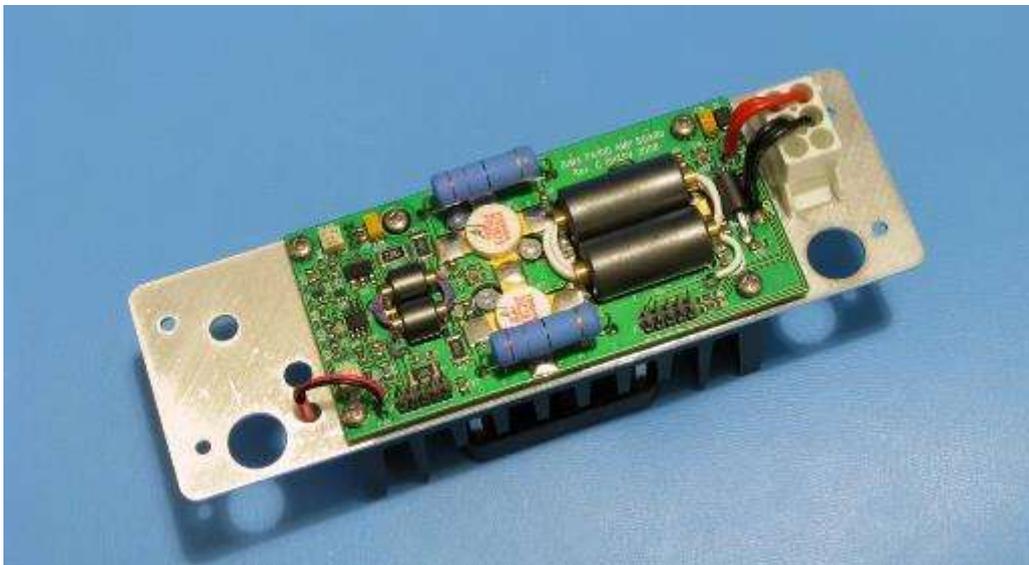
Snap the connector pins to the connector. Cut, peel and solder the wires to the PCB.
